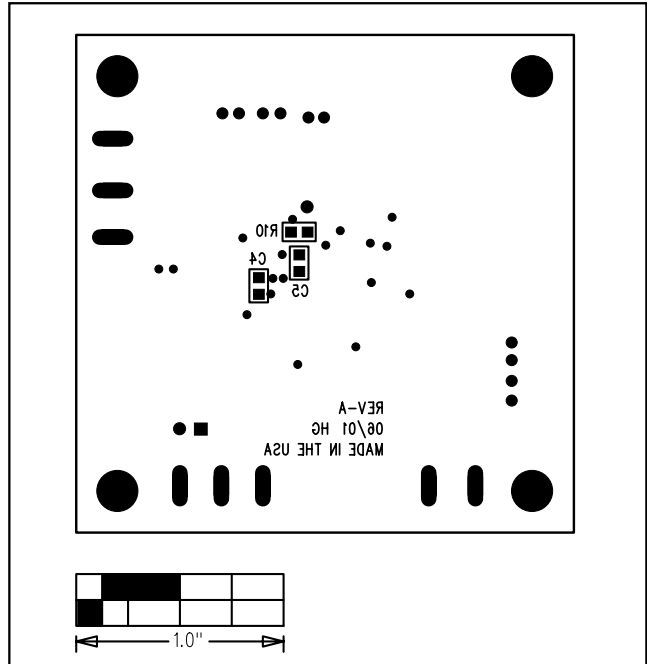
MAX1873 EV Kit Component Placement Guide—Solder Side
